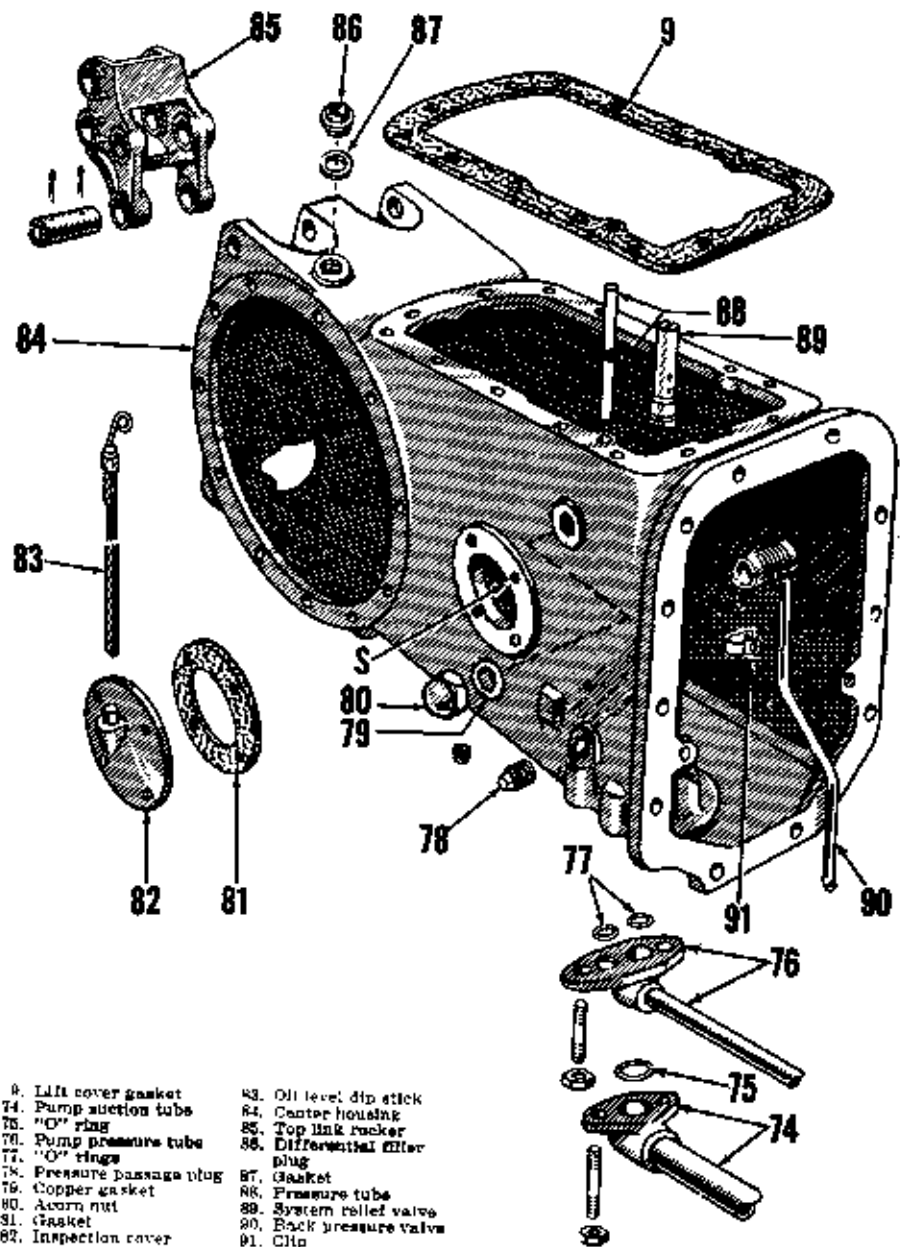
View of center (differential) housing and associated hydraulic system parts. Pump tubes (74 and 76) are replaced by a tube and manifold assembly when piston type pump is used.
